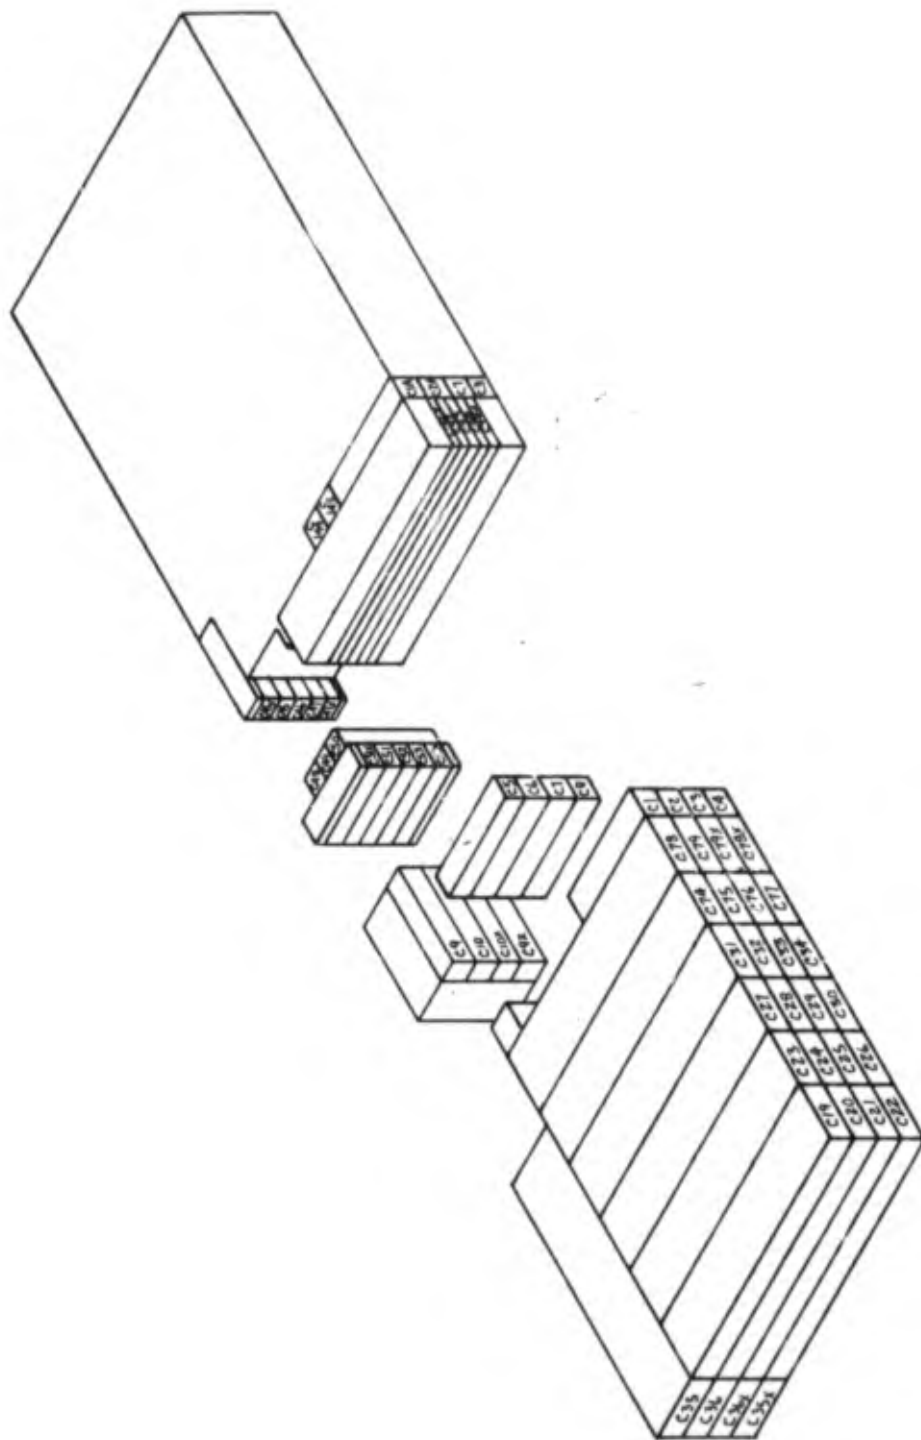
9Ni-4Co-0.45C Billet Cutting Diagram, Heat No. 3882720
